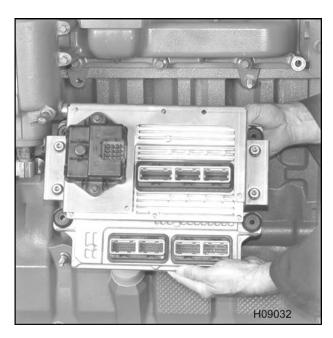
Installing the ECM, IDM, and EGR drive module assembly to crankcase
